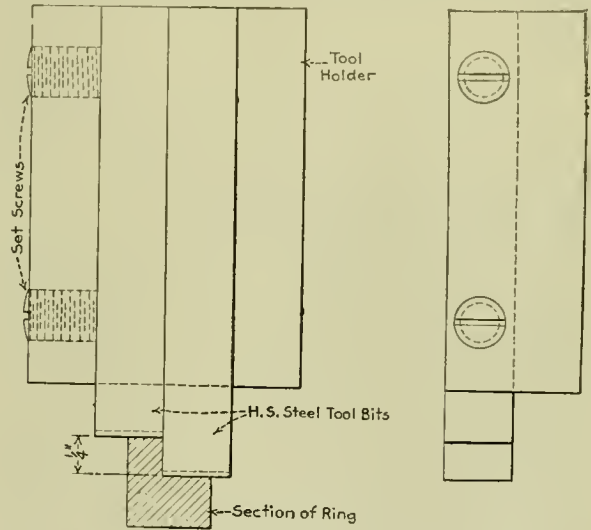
Arrangement of Form Tool to Face the Top of the Packing Ring
